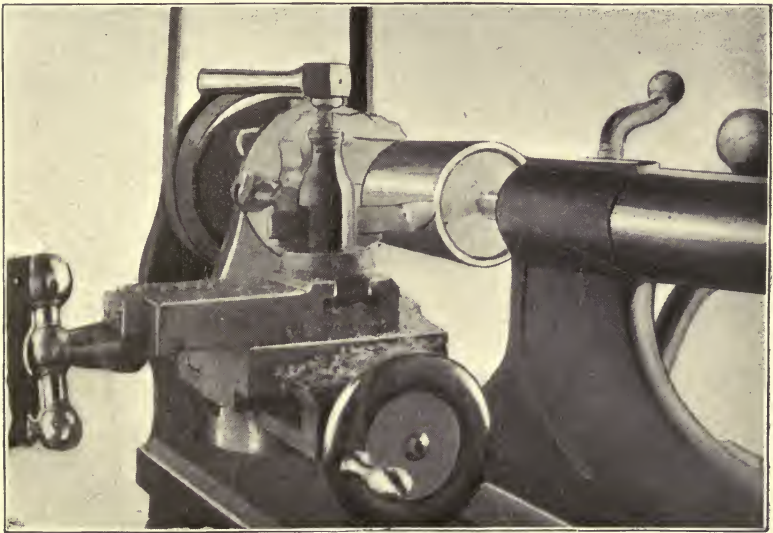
FACING UP ENDS OF STEEL PISTON SHELL.
